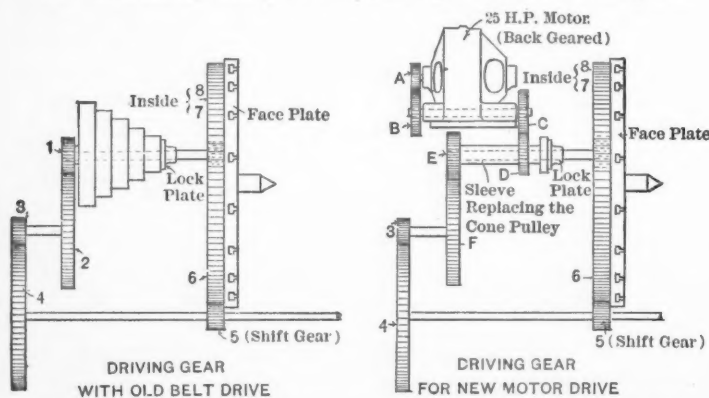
DIAGRAMS OF THE OLD AND NEW ARRANGEMENTS OF THE GEARING IN THE DRIVE OF THE NILES DRIVING WHEEL LATHE, SHOWING CHANGES NECESSARY FOR THE MOTOR DRIVE.
